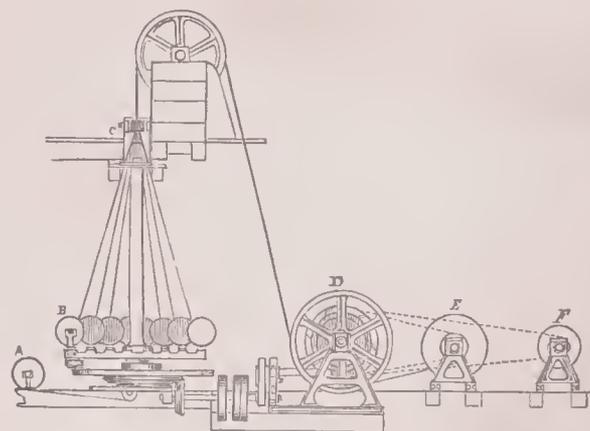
A twelve-flyer machine, for forming the strands: A, heart; B, bobbins; C, top and tube; D, draw-off drum; E, bobbin for larger sizes; F, bobbin for smaller sizes.
